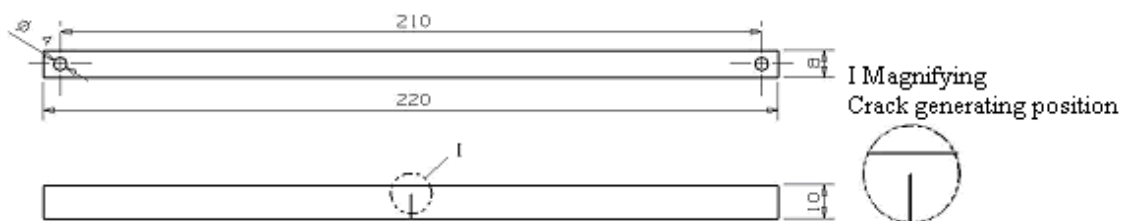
Sketch Map of Simulated Girder Size and Crack Generating Position (Unit: mm)
